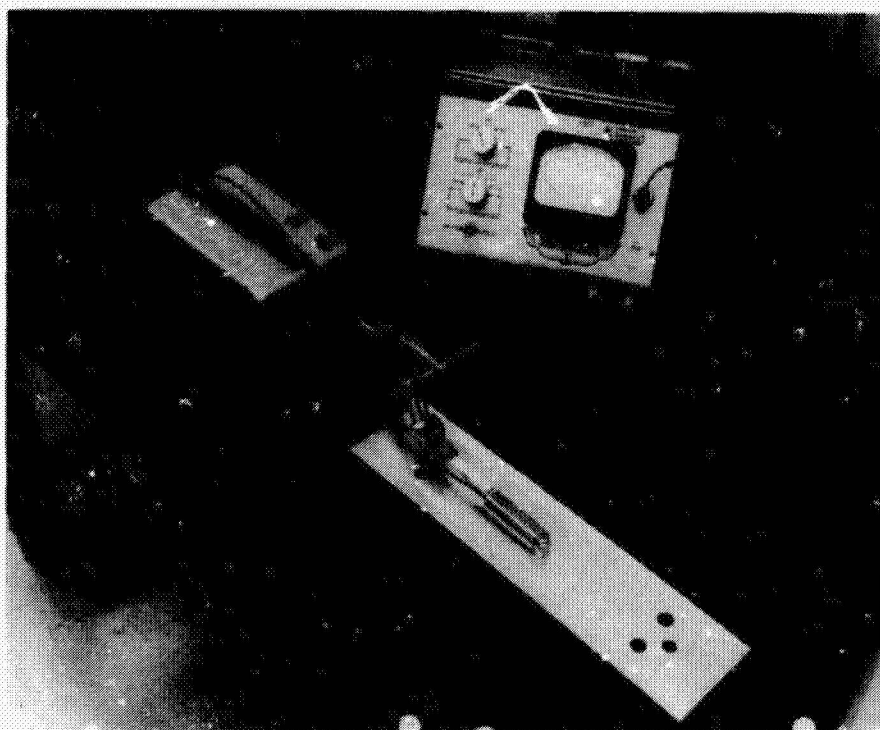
Measuring the Surface Finish of a Completed Test Specimen With a Surfindicator
